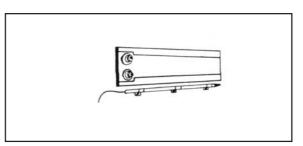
Thermostat bulb clamped near strip or flat heater.
